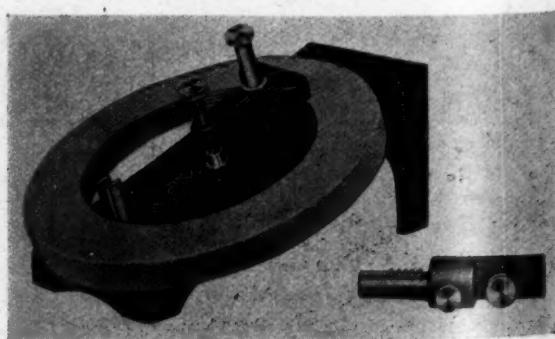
Sulphur cast attachment for examination of thread sections of large diameter rings
